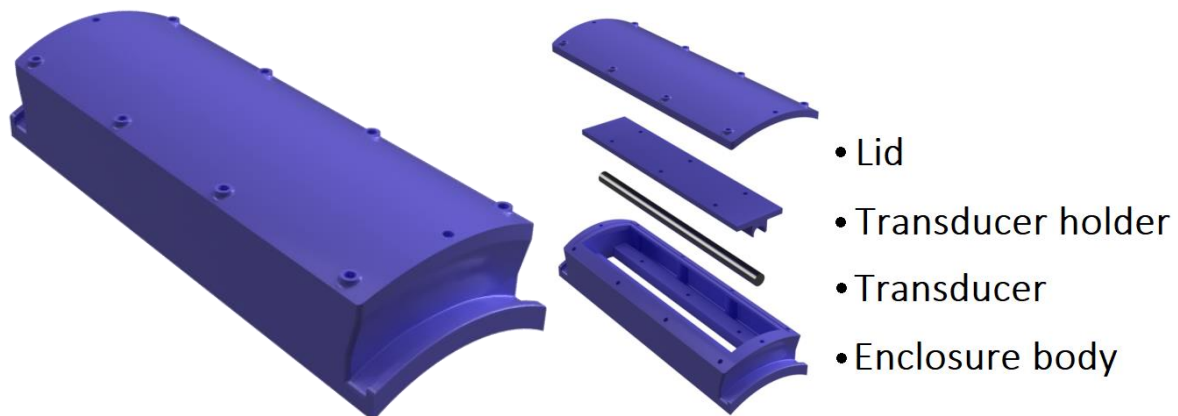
Version 1 of clamp-on designed for cable tie mounting. Exploded view on the right with named components.
